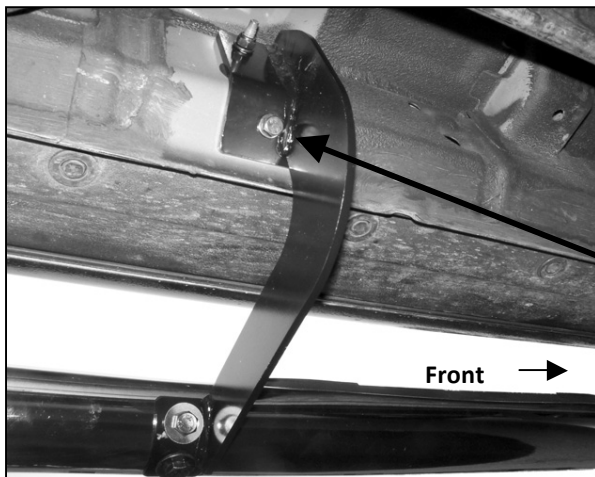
Driver side rear mounting location pictured. Note: Remove plastic plugs to locate factory threaded holes
